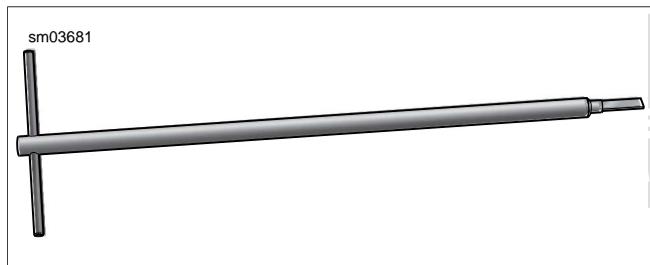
Ignition Switch Connector Remover (HD-45961)
